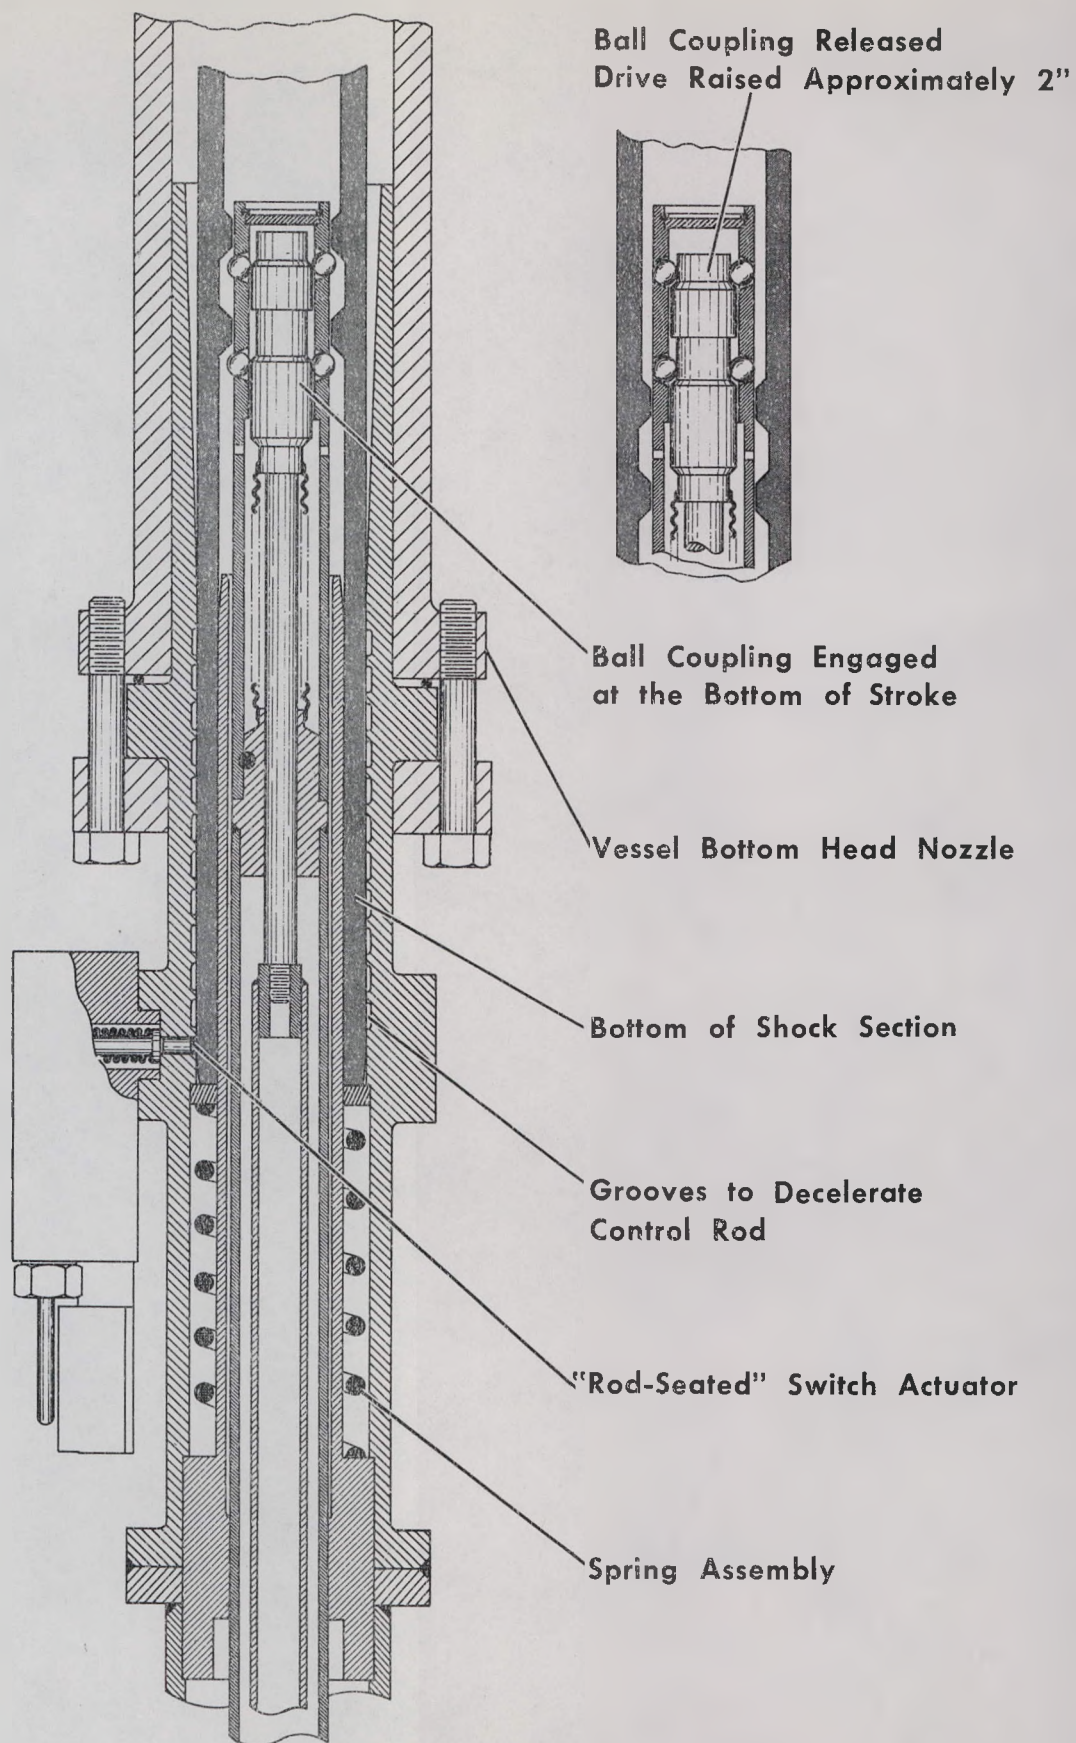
CONTROL ROD DRIVE BALL COUPLING
